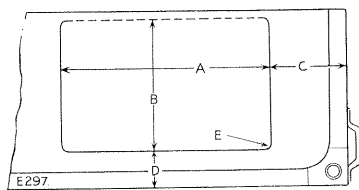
Position of cut-out in L.H. side wheel arch locker base—109 models
